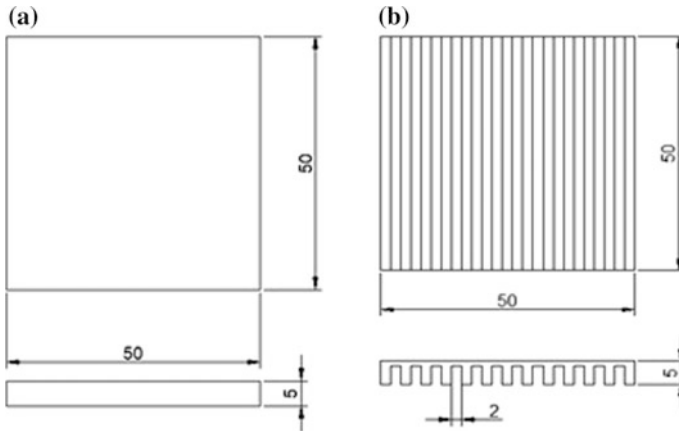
Dimensions of (a) bare (b) finned heat sinks
